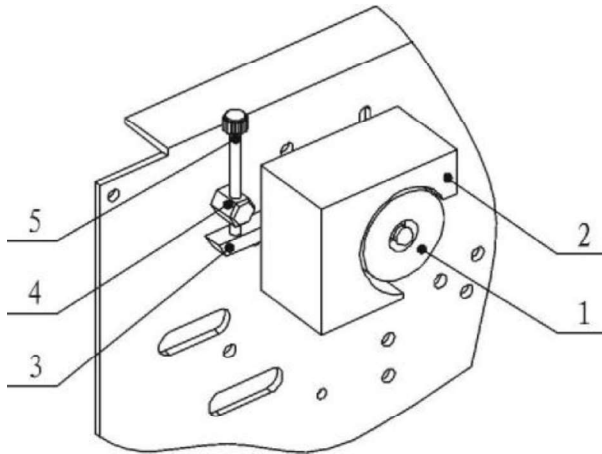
(1) Ink Roller, (2) Ink Roller Heating Block, (3) Swing Pole, (4) Adjusting Strut, (5) Ink Wheel Adjusting Device
